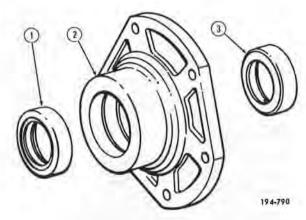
Sectional View of Front Compound Main Drive Pinion Bearing Cover (Non-Current Production)
